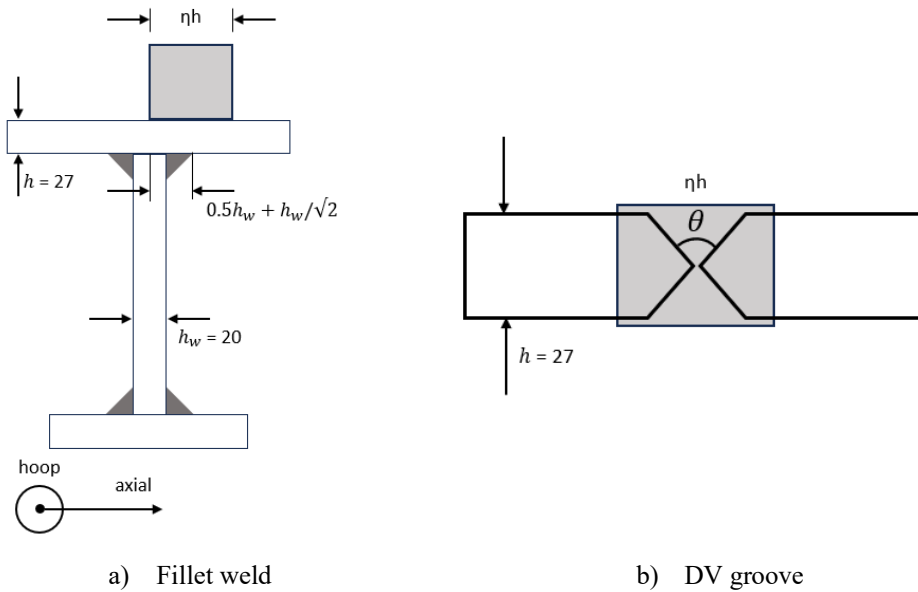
Illustration of the lower and upper bounds for the assumed weld-affected width for a) fillet weld and b) DV groove.
